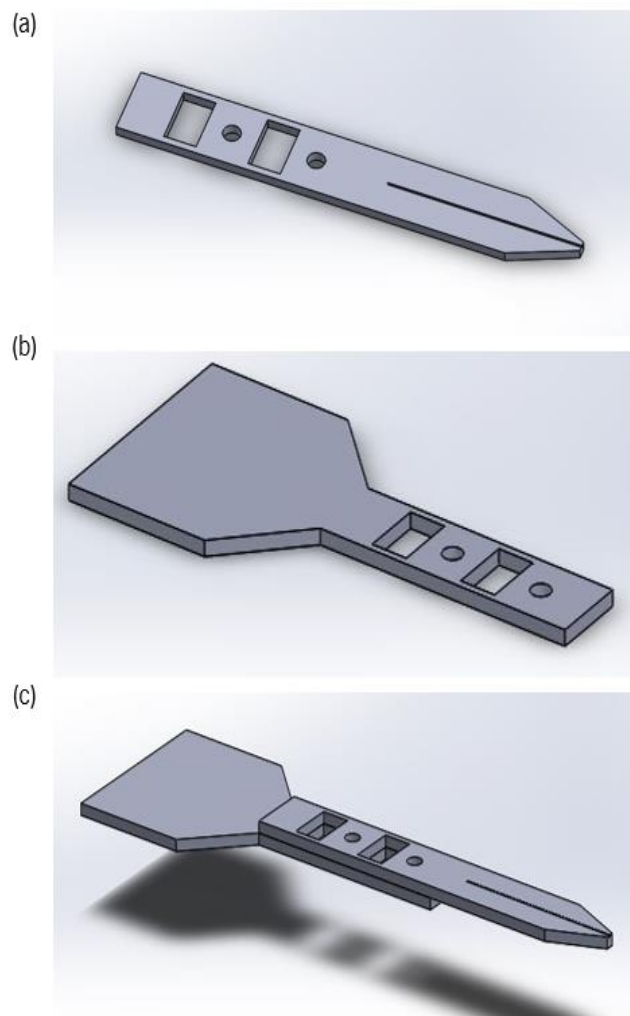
3D model of the recording prototype design on AutoCAD software. (a) - Tetrode support structure. (b) - Electrode interface board structure. (c) - Tetrode support and electrode interface board parts combined.
